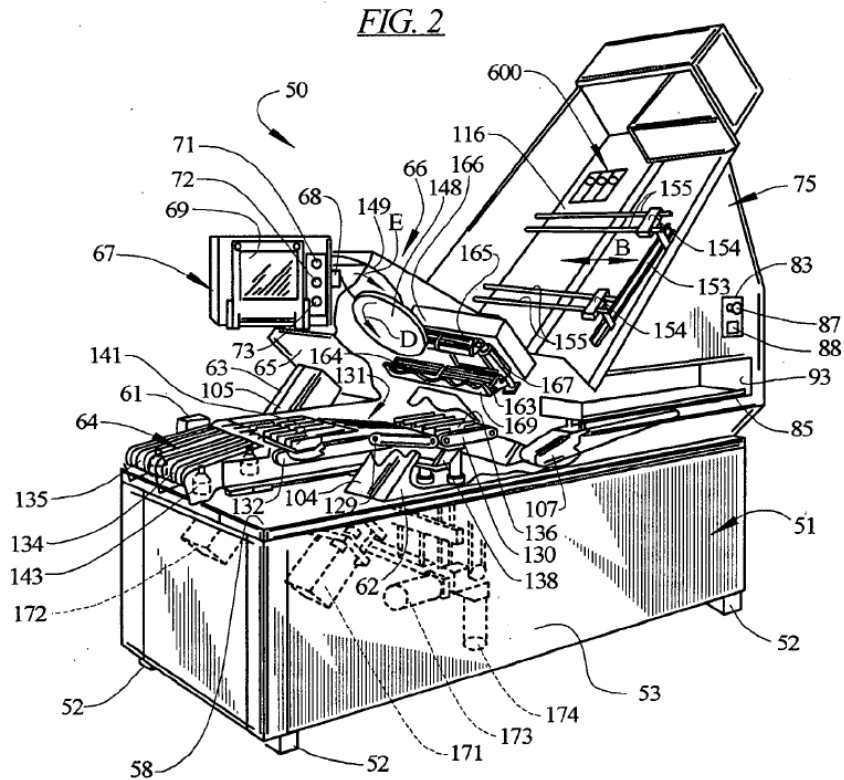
above is a perspective view of Pryor's slicing machine. Ex. 1005 ¶ 29. Slicing machine 50 includes base 51 that “affords an enclosure for” computer 54. *Id.* ¶ 37. Slicing machine 50 also includes slicing station 66 and loaf feed mechanism 75. *Id.* ¶¶ 38, 40.
